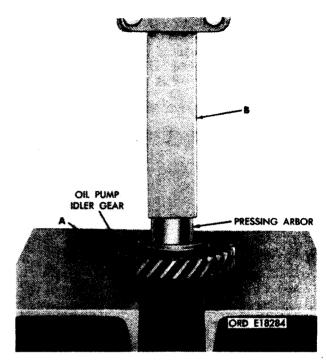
REMOVING IDLER GEAR BALL BEARING FROM OIL PUMP IDLER GEAR.
